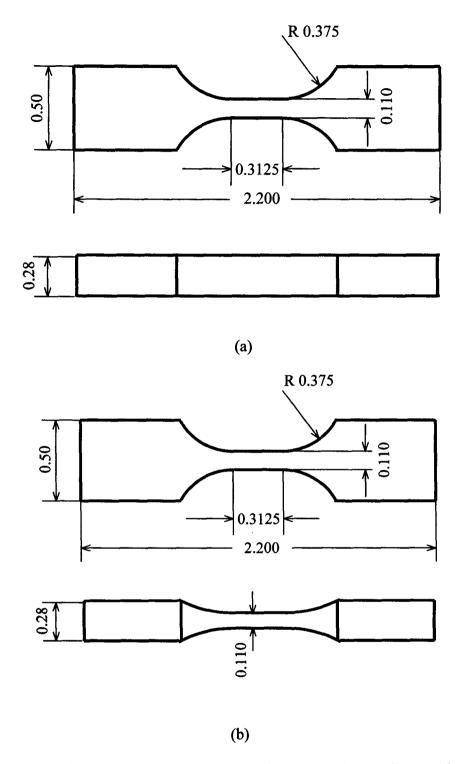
Dog-bone shaped tensile test specimen and adapters, (a) specimen with uniform thickness, (b) specimen with reduced cross sectional area.
